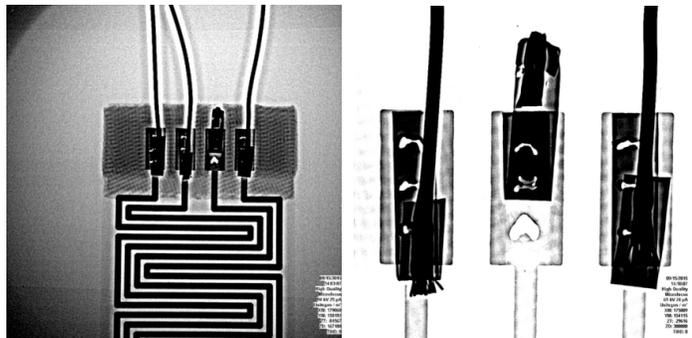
(a) X-Ray image of the lead wire pulled to failure, and (b) close up of the broken lead wire near the weld.
